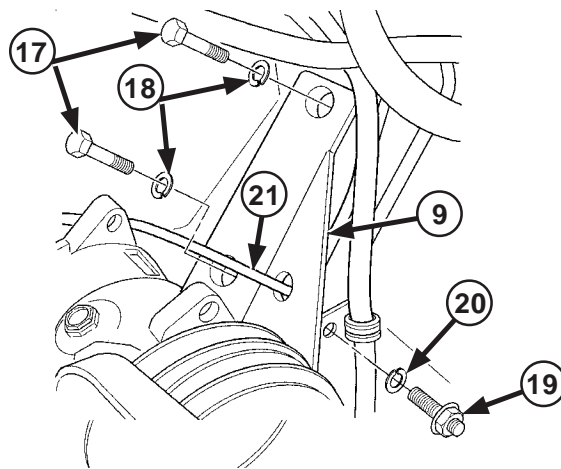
Compressor Mounting Bracket to Cylinder Head
